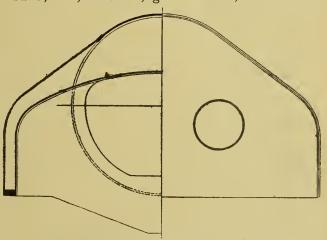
Cross Section and Elevation, Wootten Firebox.
